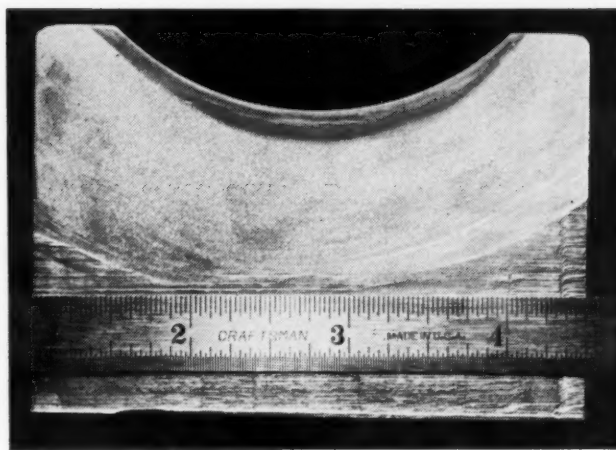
POLISHED AND ETCHED SECTION OF A GROOVED ROLL AFTER FLAME HARDENING BY THE SPINNING METHOD
